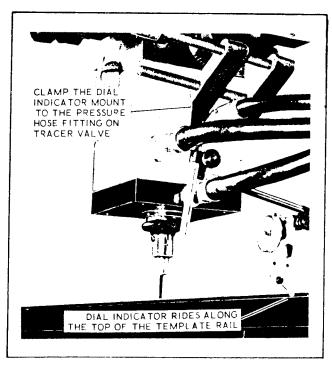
Dial Indicator Attached to Tracer Valve for Indicating Template Rail
